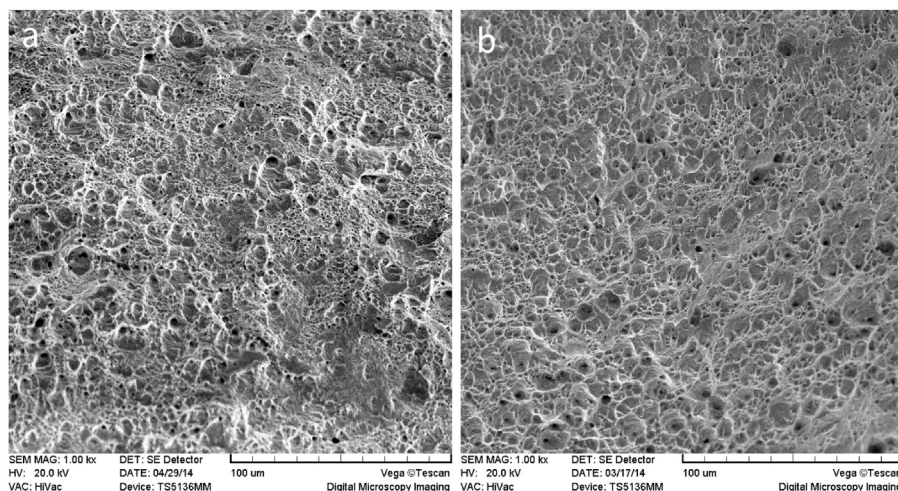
SEM images of the fracture surfaces for the joints welded at (a) lower heat input and (b) higher heat input.
